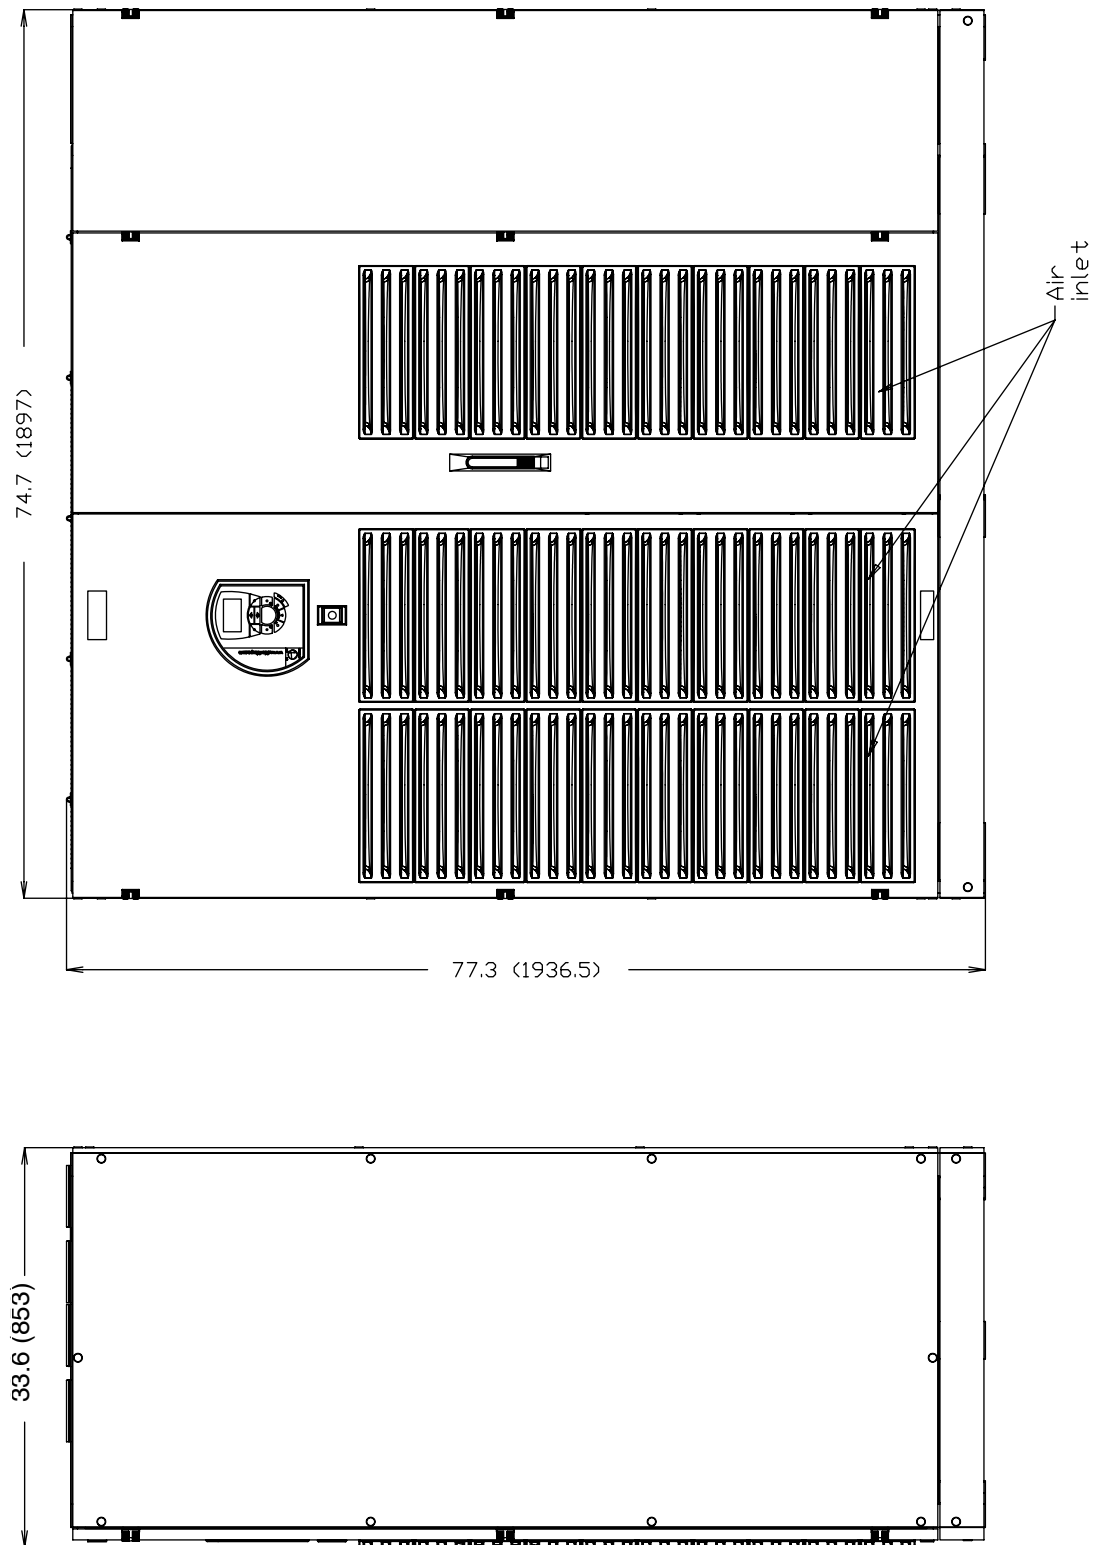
Input and Output cubicles External Dimensions - Front view 750kVA
